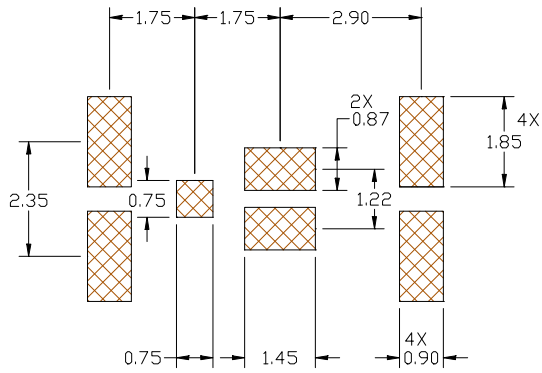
Recommended PCB Pad Layout for ICEPak 6.3x4.9mm-E
